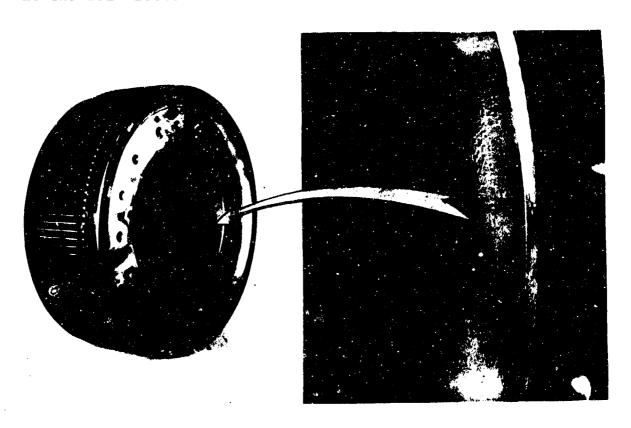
Bearing Bore Cracks, Second-Row Pinion.
